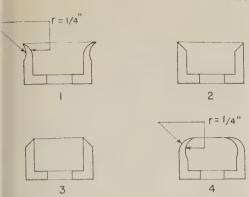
Cross section through overflow nozzles used for draining rainfall from evaporation pan.
